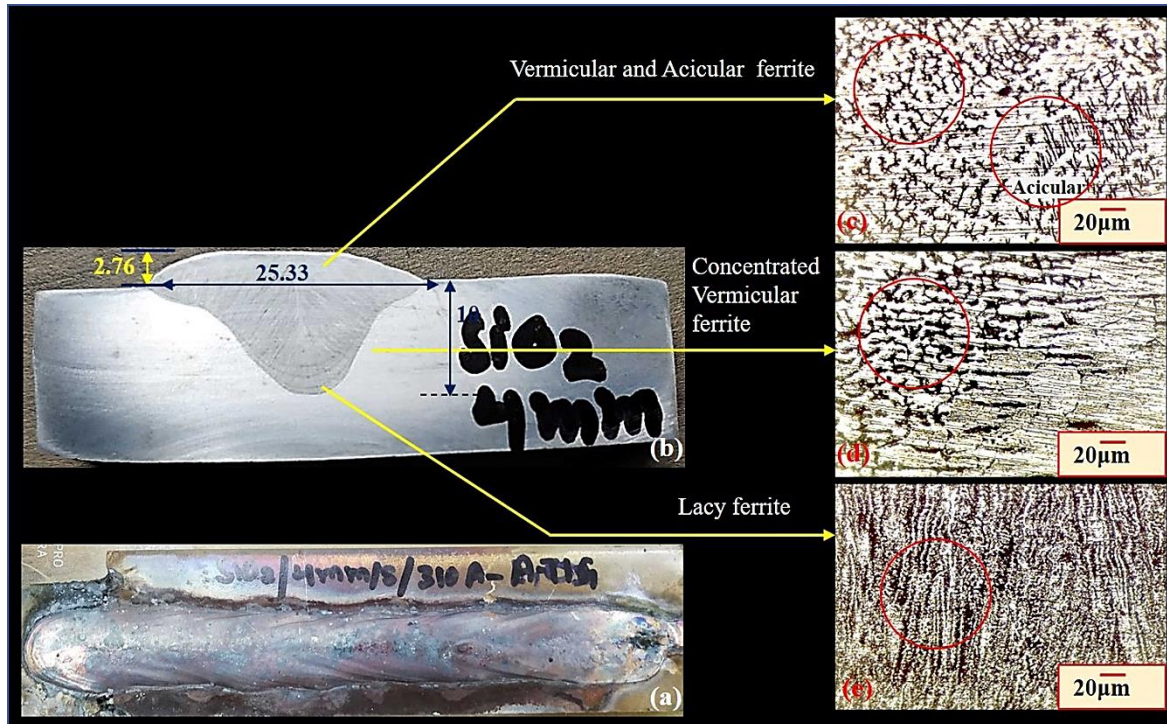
Photograph contains (a) Hybrid welded coupon using SiO_2 flux at 4 mm/s welding speed (b) Macrograph of the etched specimen (c), (d), and (e) showing the microstructure of different regions of weld bead
